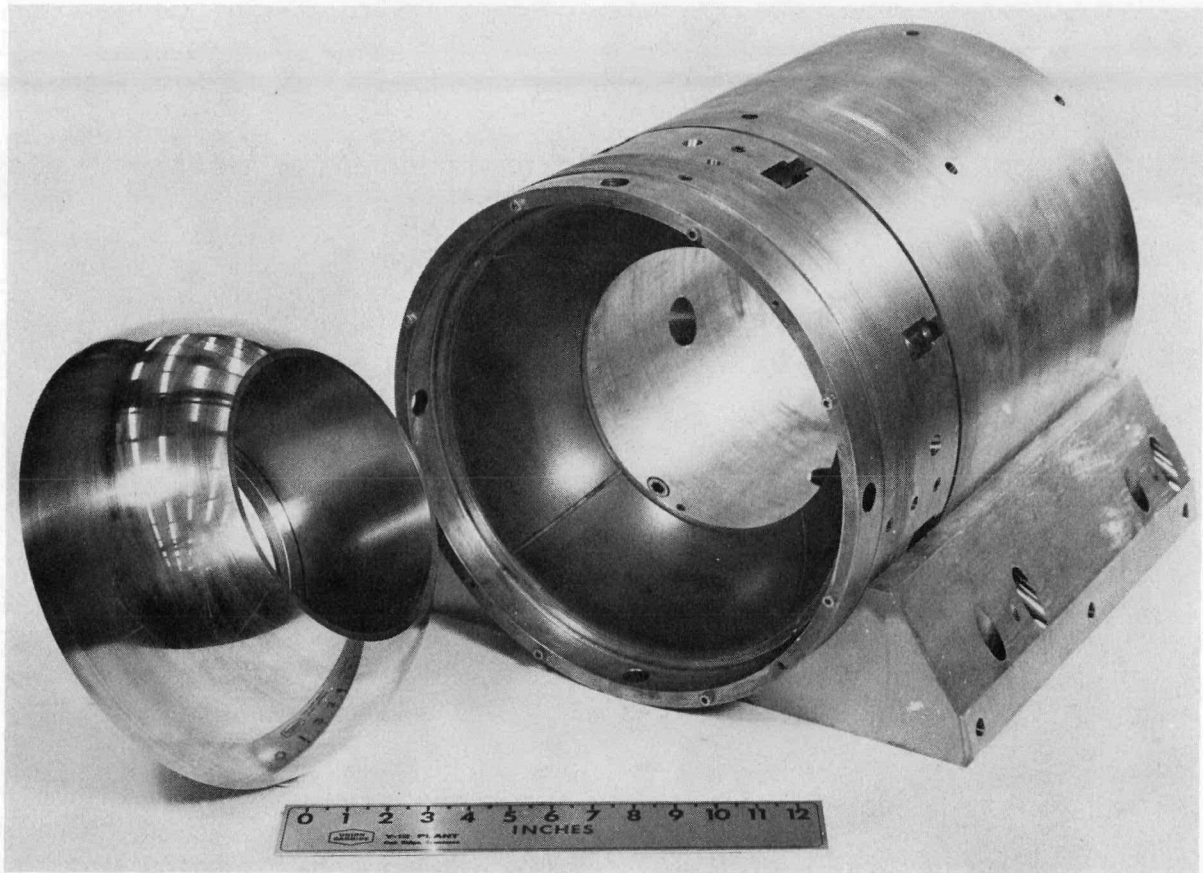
SPINDLE HOUSING AND MOUNTING PAD.
